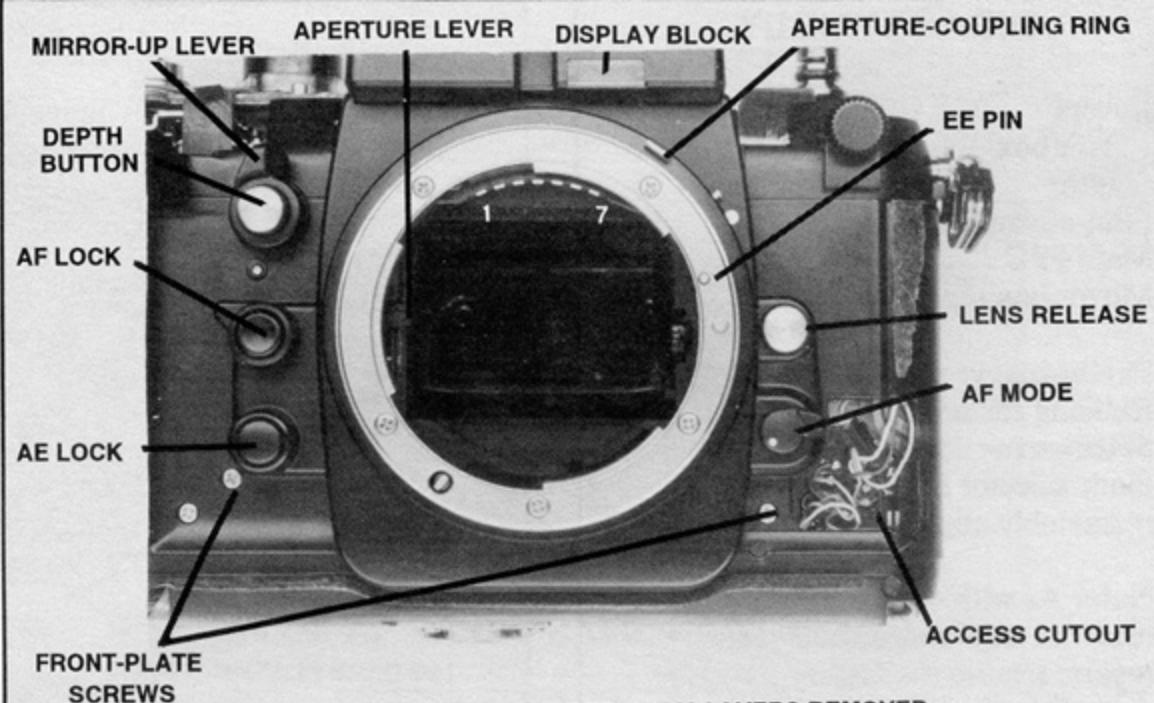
FRONT VIEW, RUBBER BODY COVERS REMOVED
